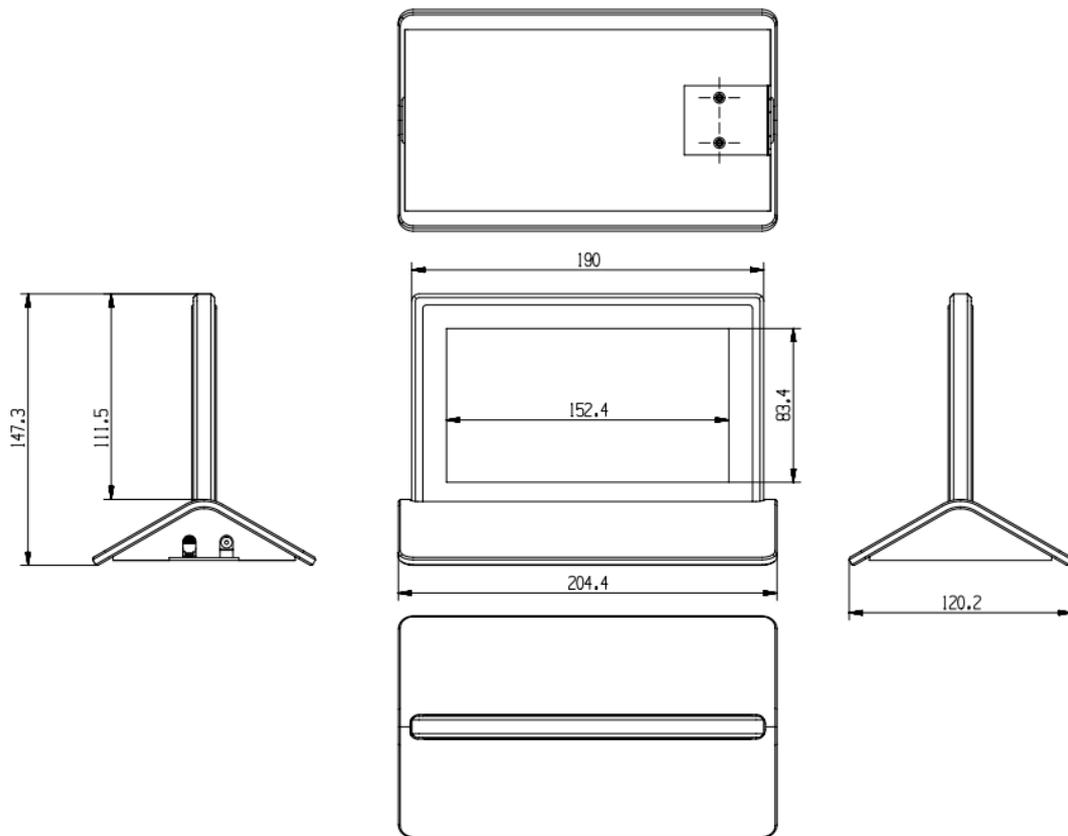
Dimensional drawing of the 7" electronic nameplate panel
